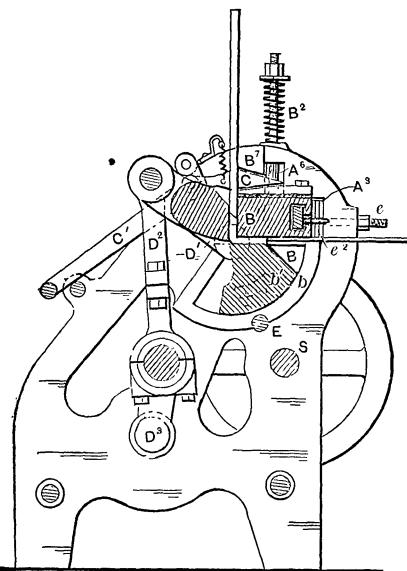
Vertical Section Showing Arrangement of Parts After Bending.
